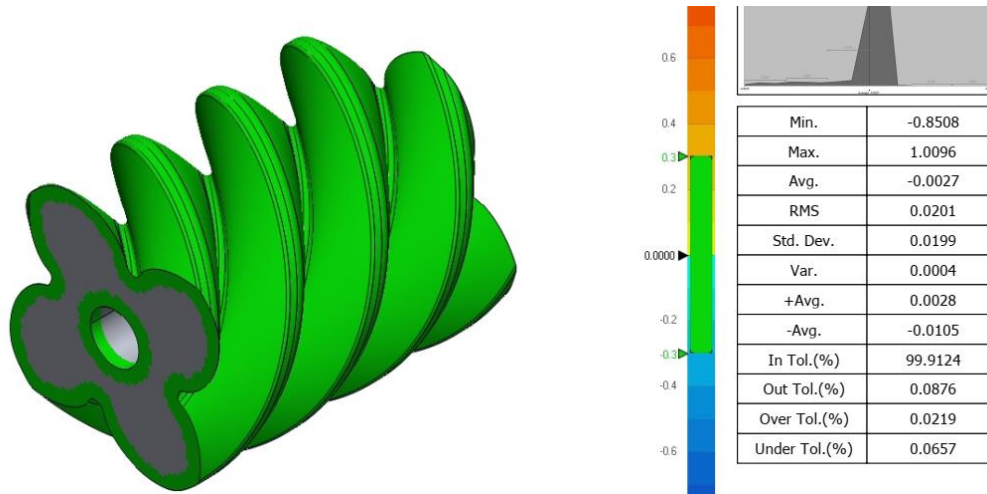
The 3D accuracy of the helical surface machined by the disc tool (the used unit is mm)
